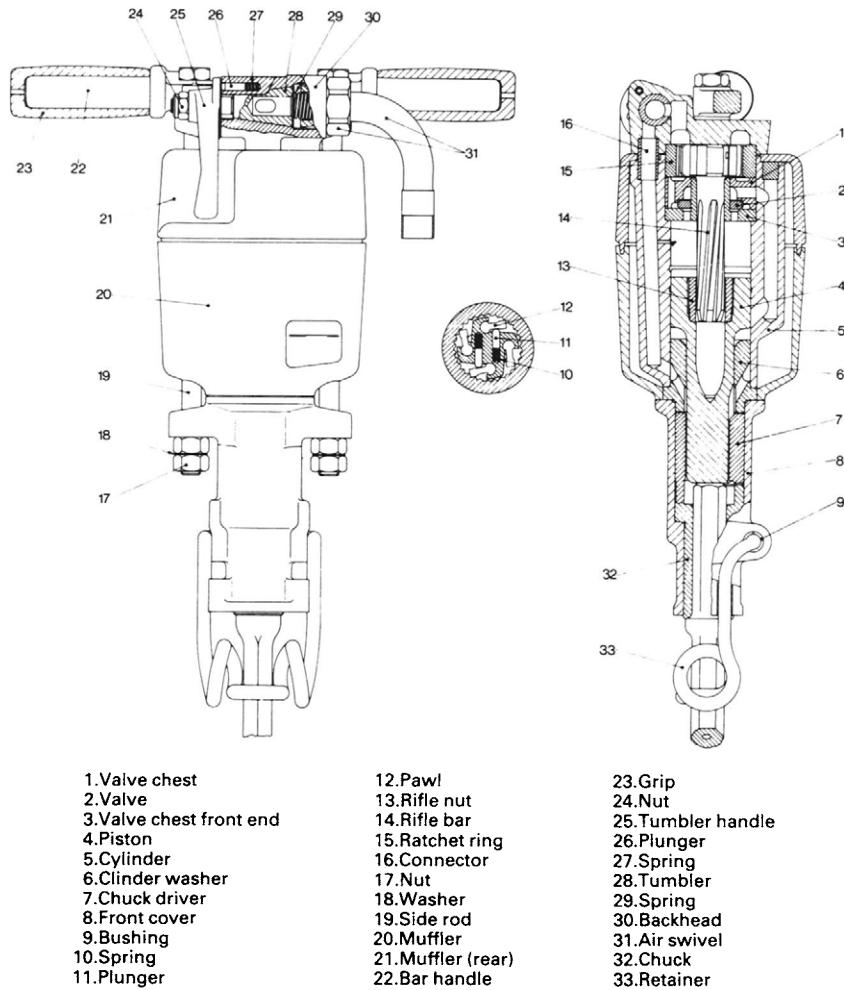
A modern road breaker tool, cut away to show the construction.
